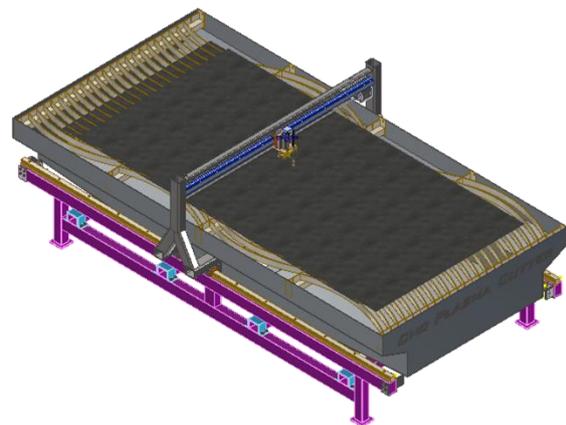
3D model of CNC Plasma Cutting Machine Frame
